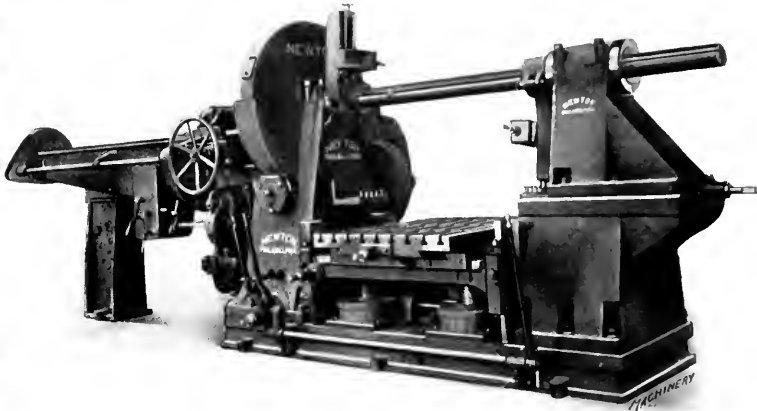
Front View of Newton Locomotive Cylinder Boring Machine
